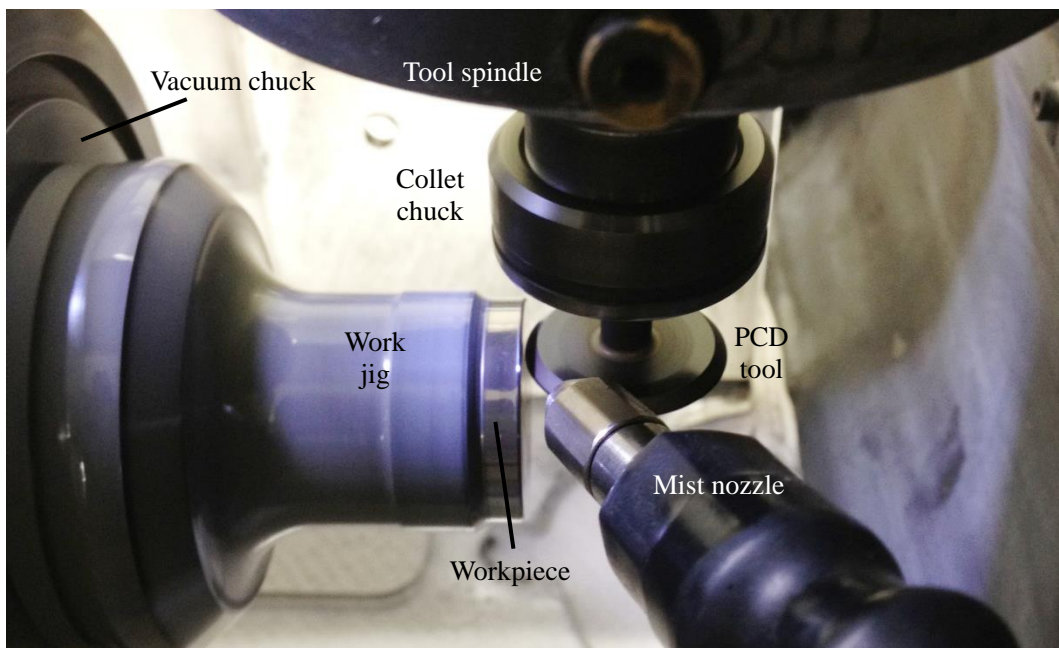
Experimental set-up of Fresnel shape cutting with PCD milling tool.
